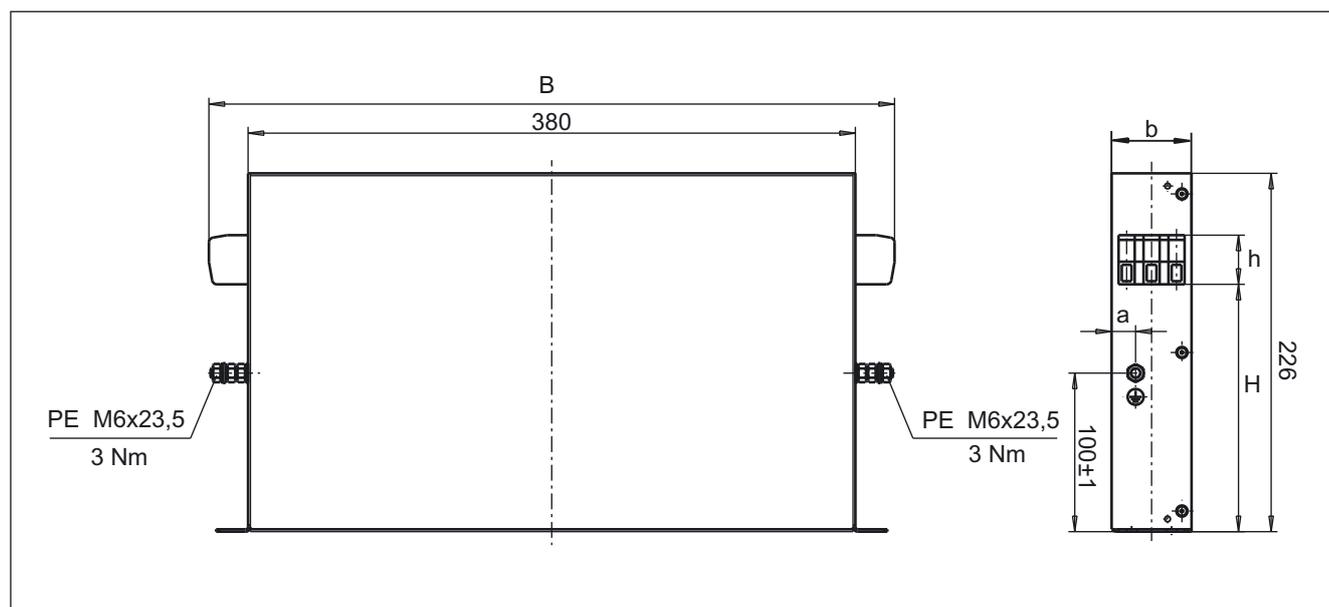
Dimension drawing: Basic Line Filter for Active Line Modules (16 kW to 55 kW)
